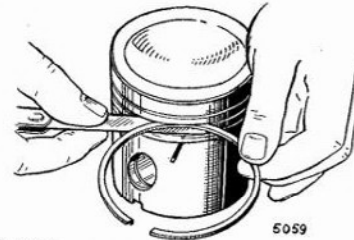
Checking piston ring to groove vertical clearance, using a feeler gauge
